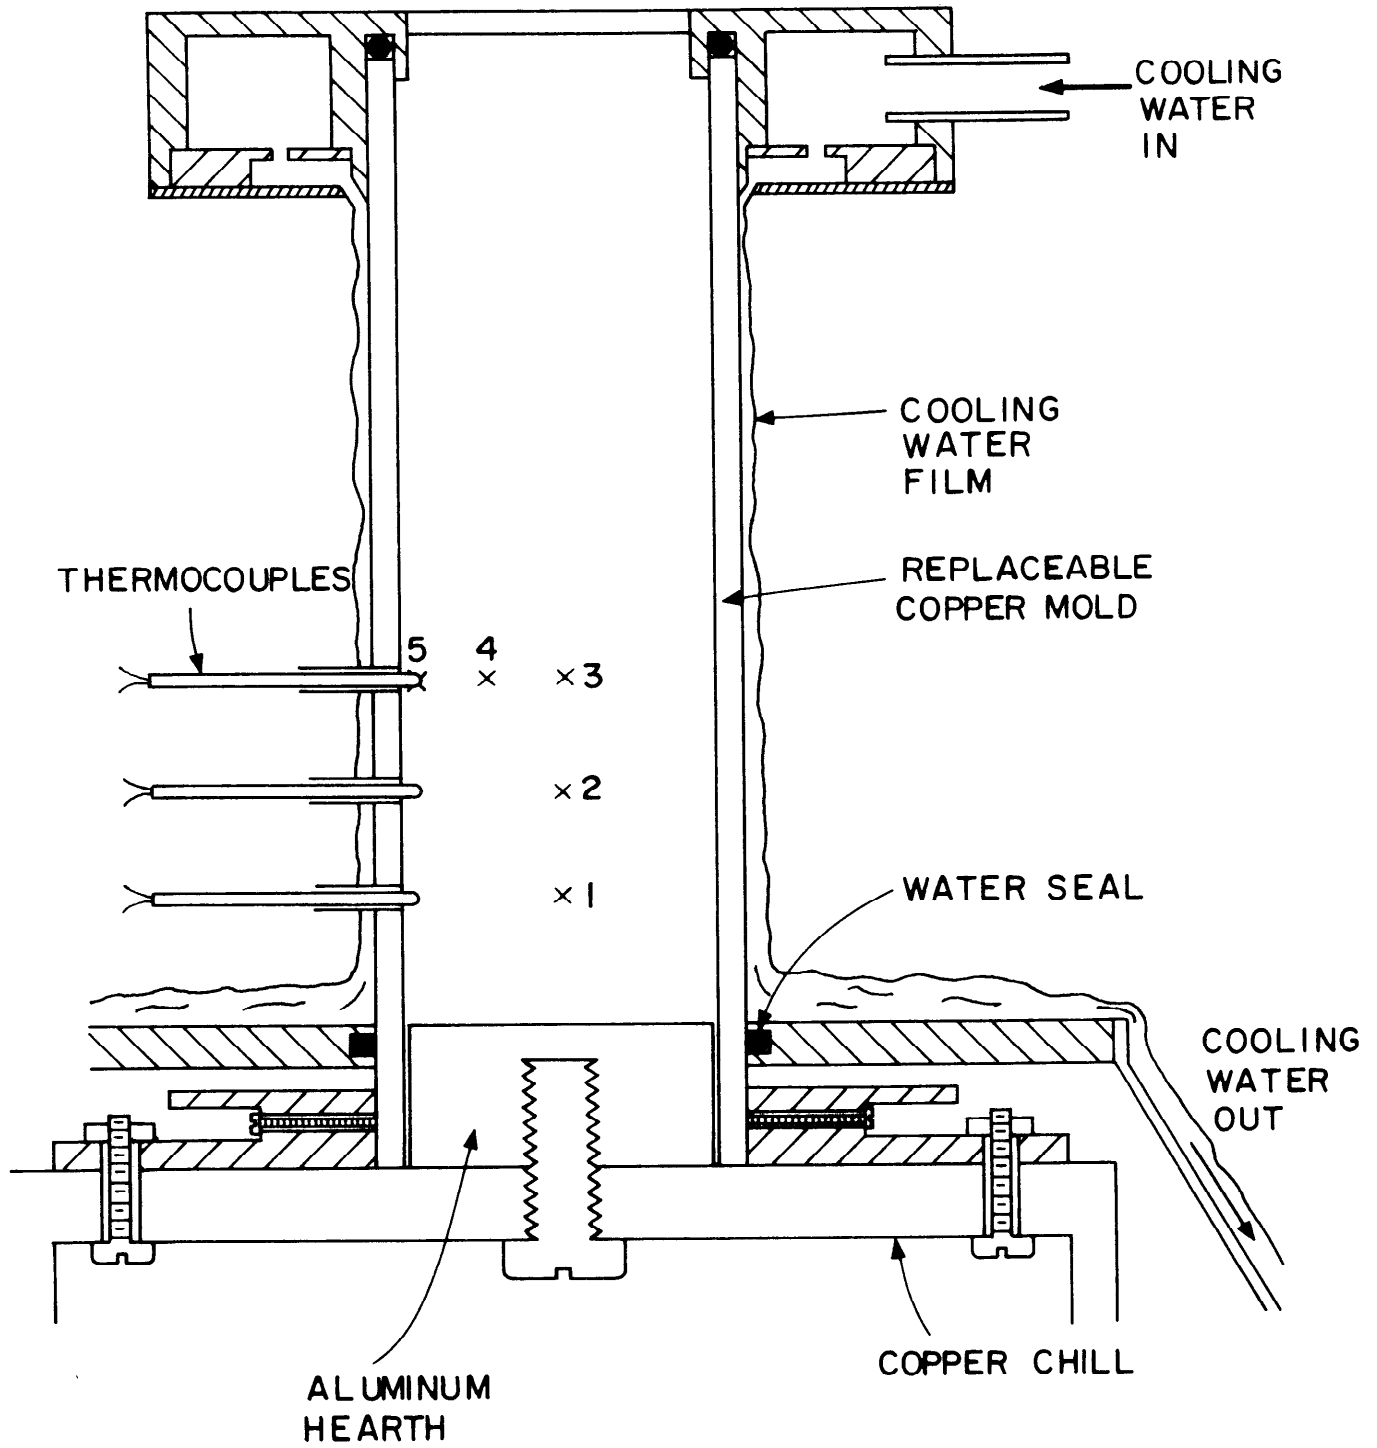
ESR mold design with replaceable mold wall. Numbers indicate thermocouples.
